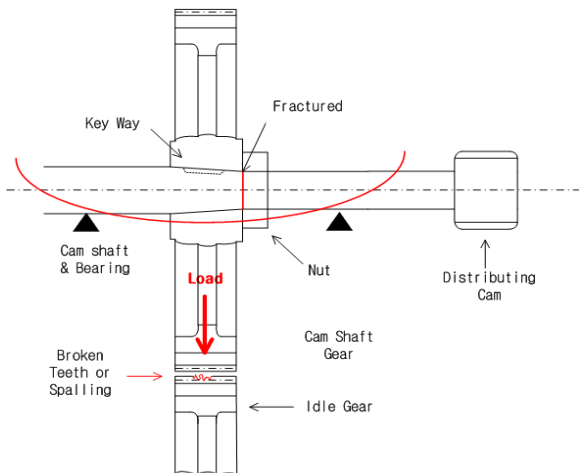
Schematic Illustrating Bending Load by Idle Gear
